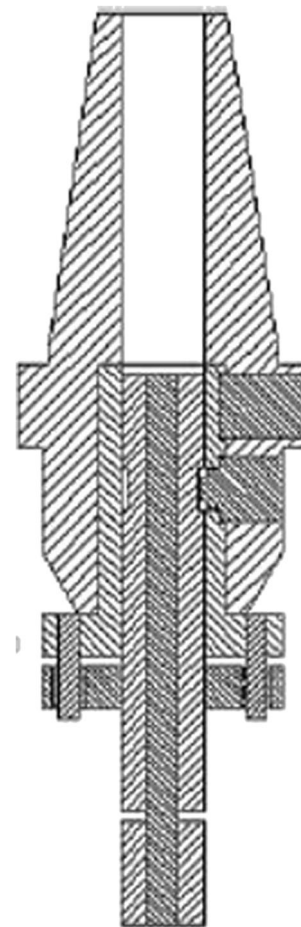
Cross-sectional drawing of the SAA-FSW tool. All components shown rotate together
